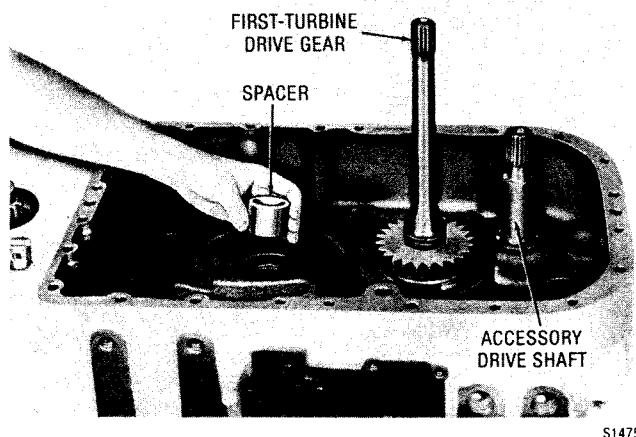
Installing forward-and-reverse sun gear spacer (-1 models)
